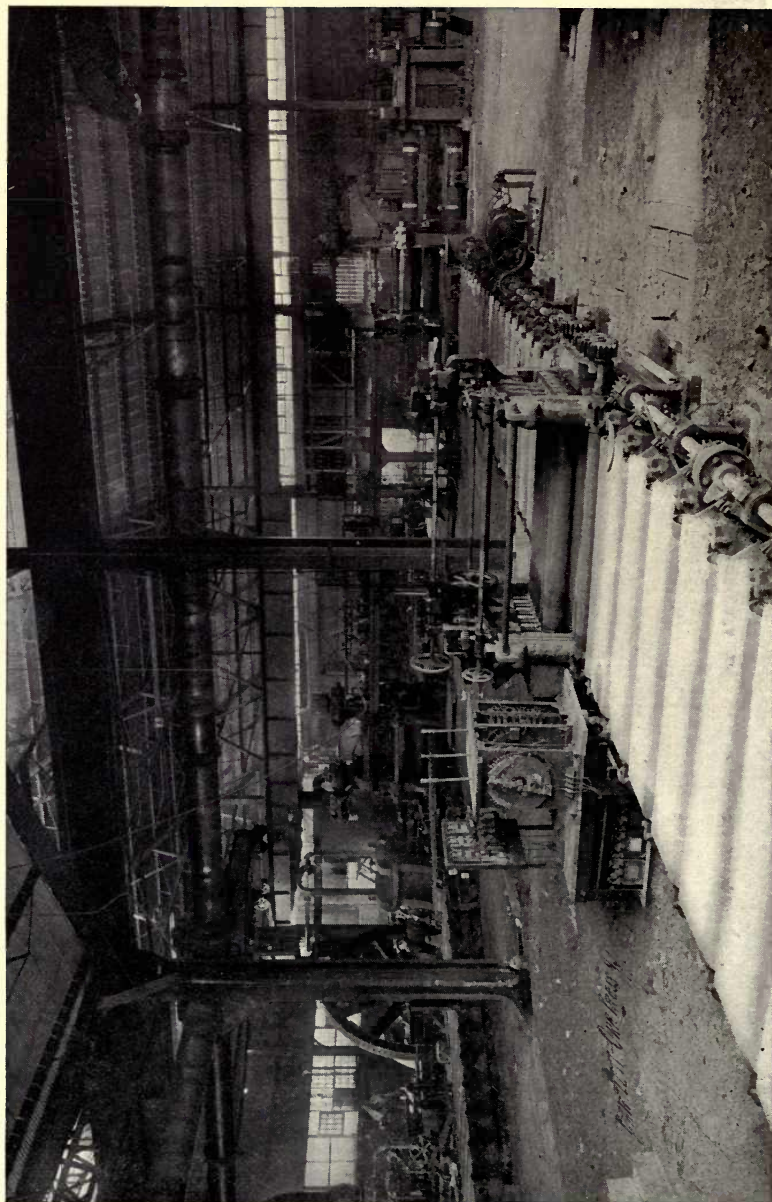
Plate Mill and Tables, LaBelle Iron Works, Steubenville, O.
